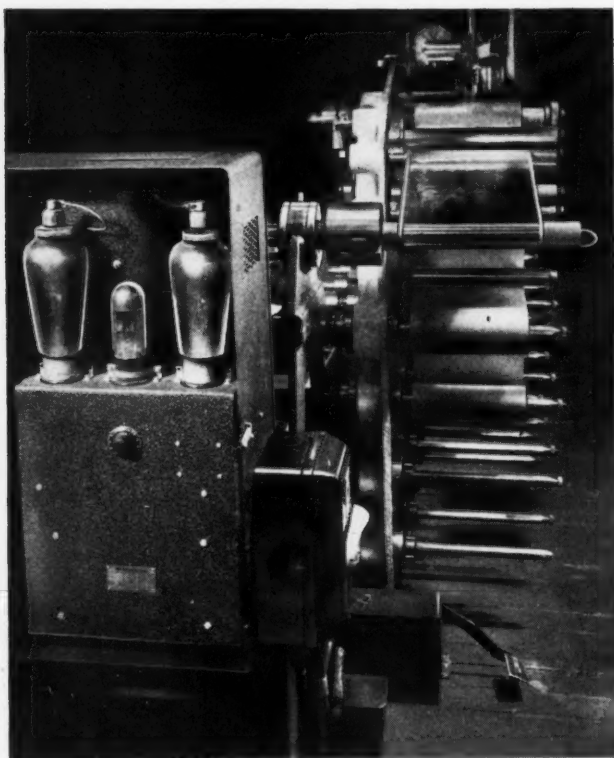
The Smooth Acceleration and Deceleration Provided by an Electronically Controlled Motor Drive has Made It Possible to Wind Capacitors by Machine without Breaking the Thin Metal Foil
